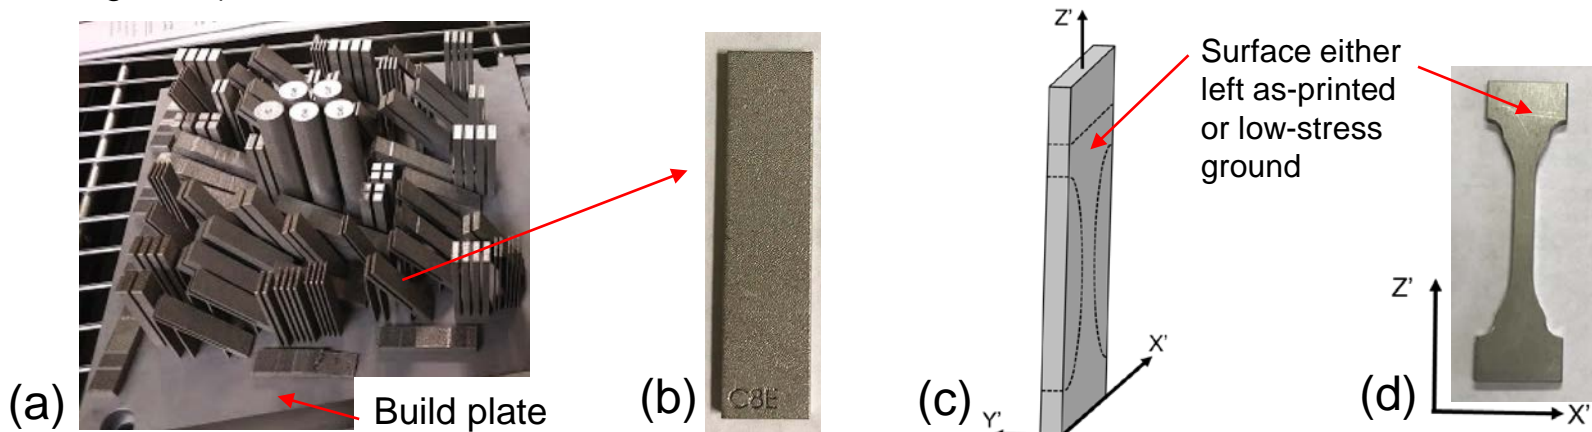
Photograph of a (a) full build plate, (b) milli-tensile sample blank (c) schematic of sample location in blank and (d) photograph of an example milli-tensile sample
